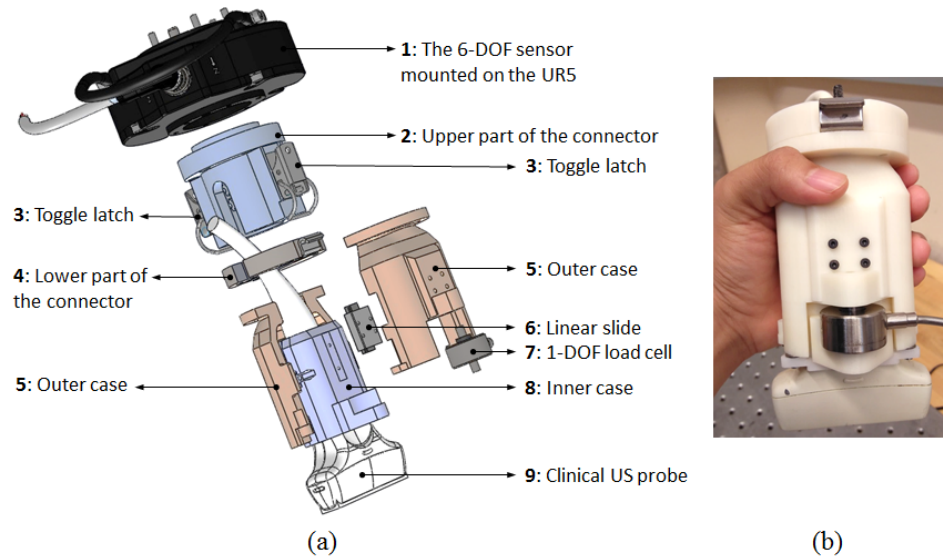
The design of the handheld US device. (a) The exploded CAD model of the handheld US device. (b) The probe holder 4-9 can be smoothly detached from the robotic arm to perform freehand scanning, while the contact force information remains accessible.
